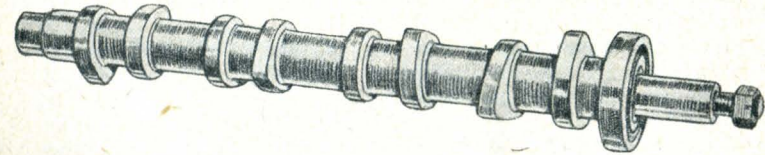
THE CAMSHAFT EMPLOYED ON THE MINOR IS OF GENEROUS DIMENSIONS AND CARRIED ON BALL AND ROLLER BEARINGS
